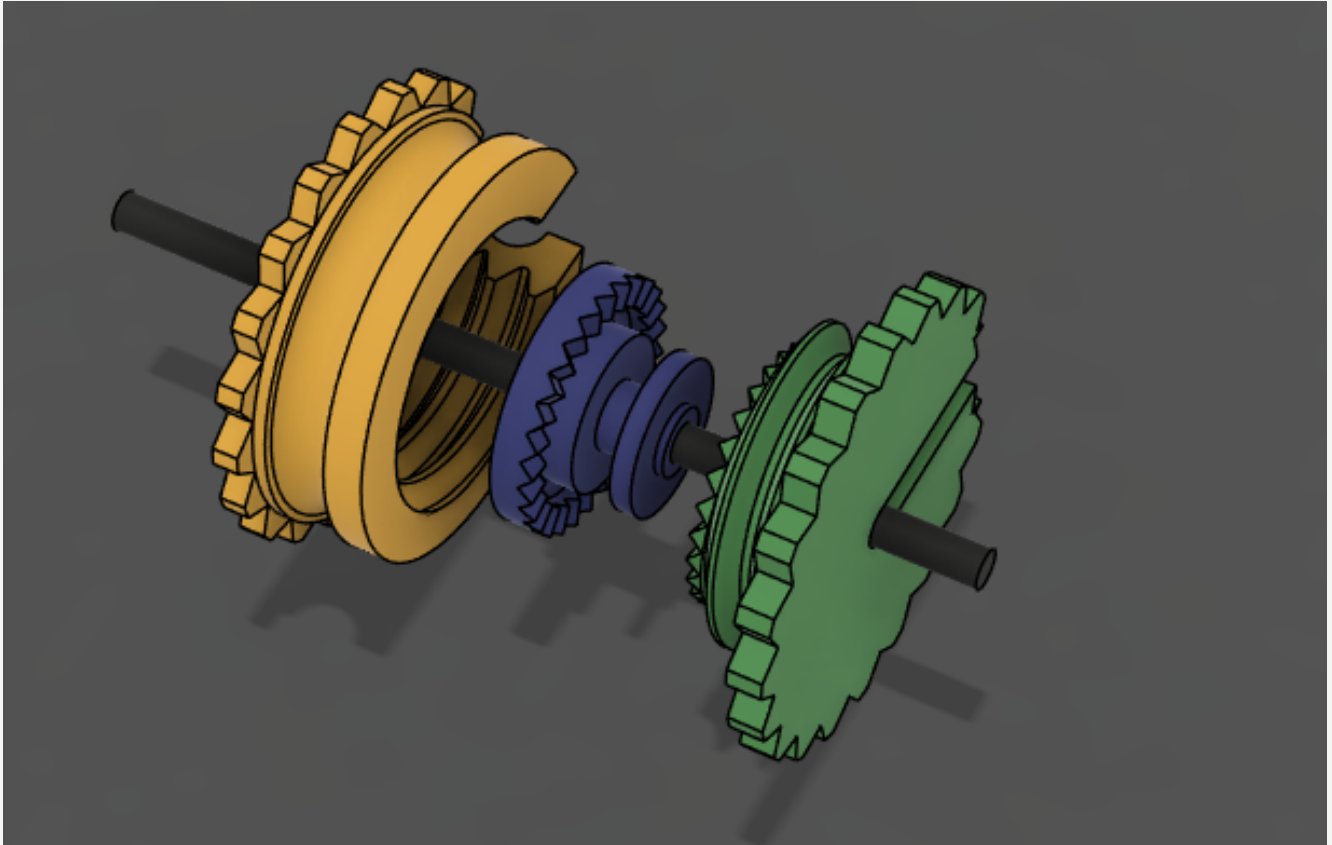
Assembly principle of the Carrera 132 axle pulley.
